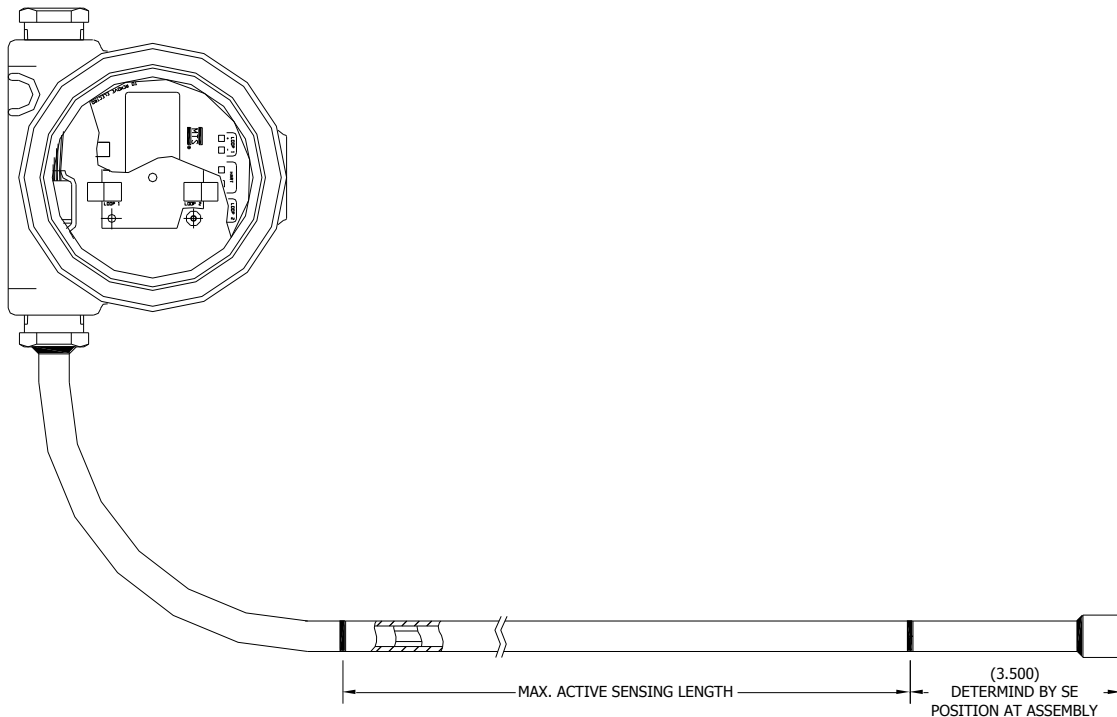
MTII4200-H-A-D-x-x-H-xxx/xxx Bent Bottom Left Hand Angled Assembly
